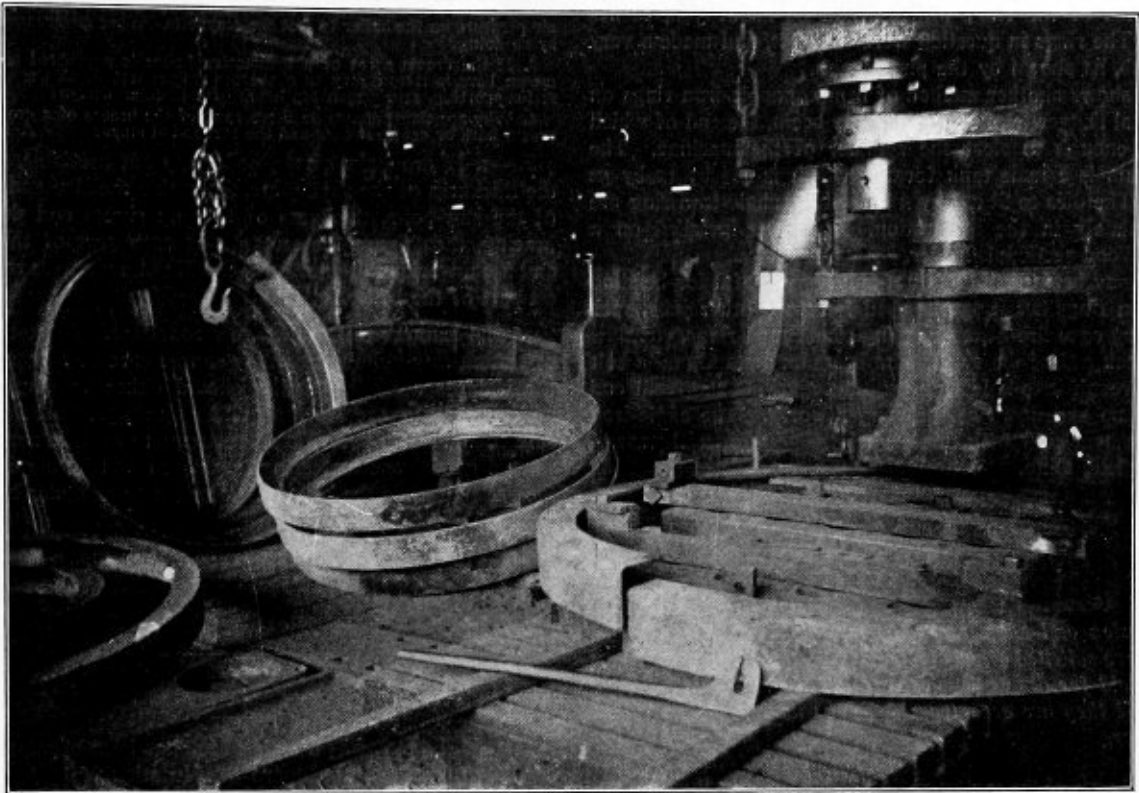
ARRANGEMENT OF DIES FOR BENDING ANGLE RINGS ON A SECTIONAL FLANGER
